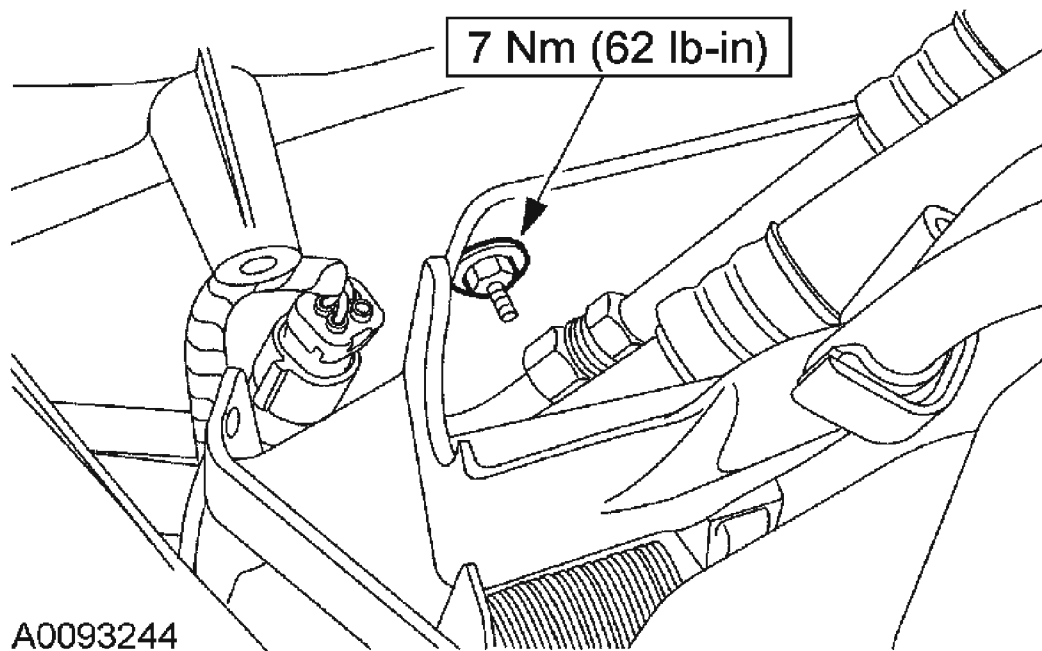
Removing Outer Heater Core And Evaporator Core Housing Nut At Dash Panel
